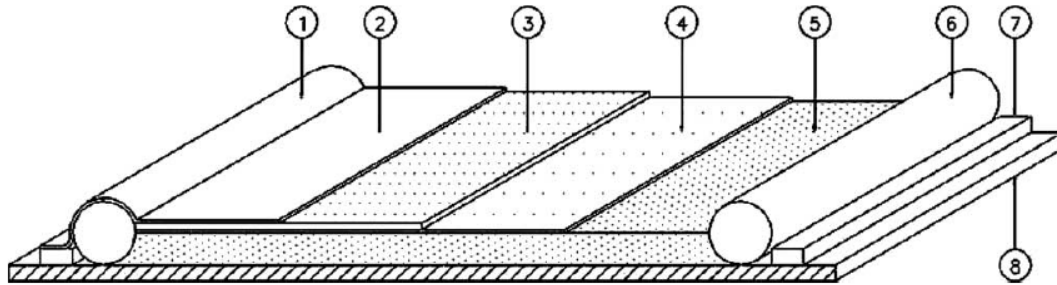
Vacuum infusion mould assembly: 1—inlet, 2—vacuum bag, 3—distribution medium, 4—peel ply, 5—reinforcement, 6—outlet, 7—vacuum seal, 8—mould die (adapted from [64]).
